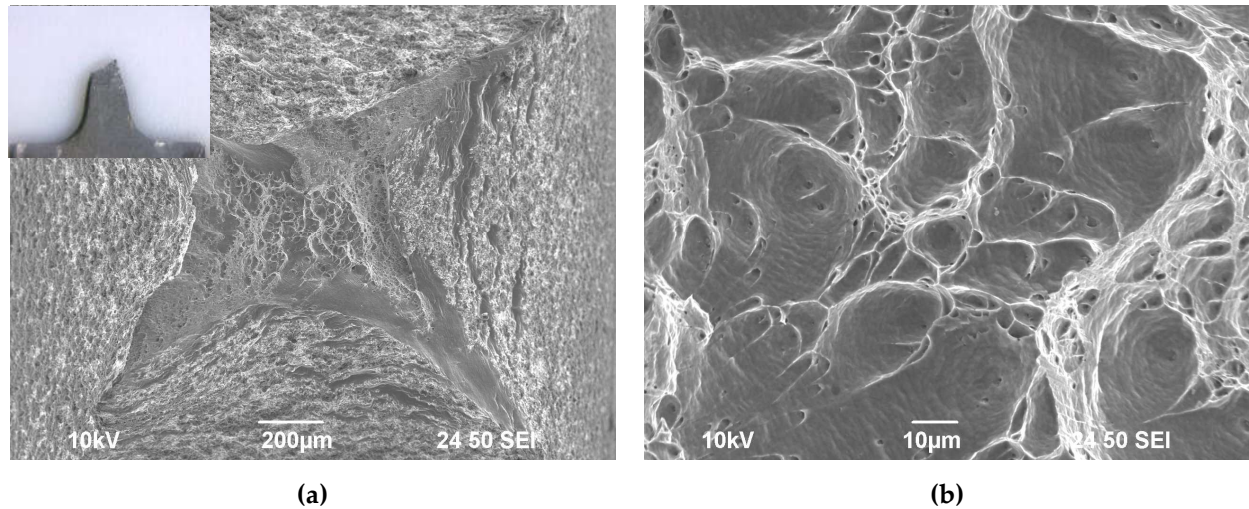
SEM images of fracture surfaces in specimen No. 5 after tensile tests at room temperature. Figure 3a offers a general view of the fracture while Figure 3b shows an enlarged image of the central part of the fracture.
